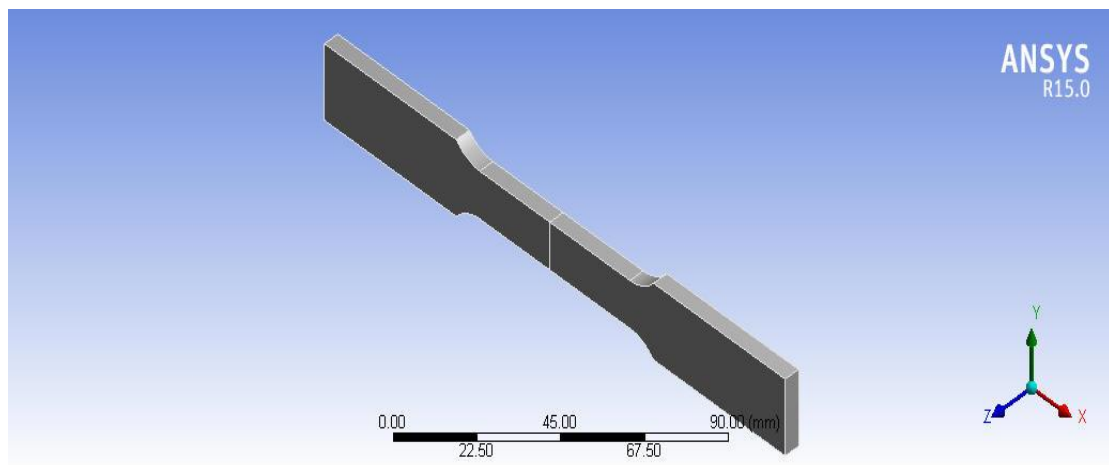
The Model of A welded specimen (Ready for Testing)
